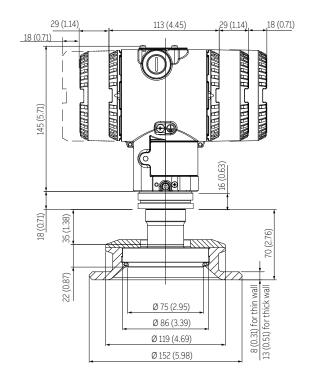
266HRH / 266NRH with barrel housing and direct mount seal S26SS Sanitary flush (For dimensions of S26 seals refer to the S26 datasheet)
